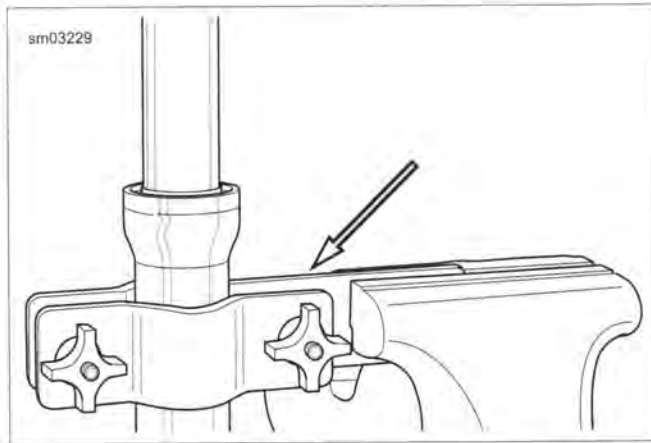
Fork Holding Tool (mounted vertically to slider)
